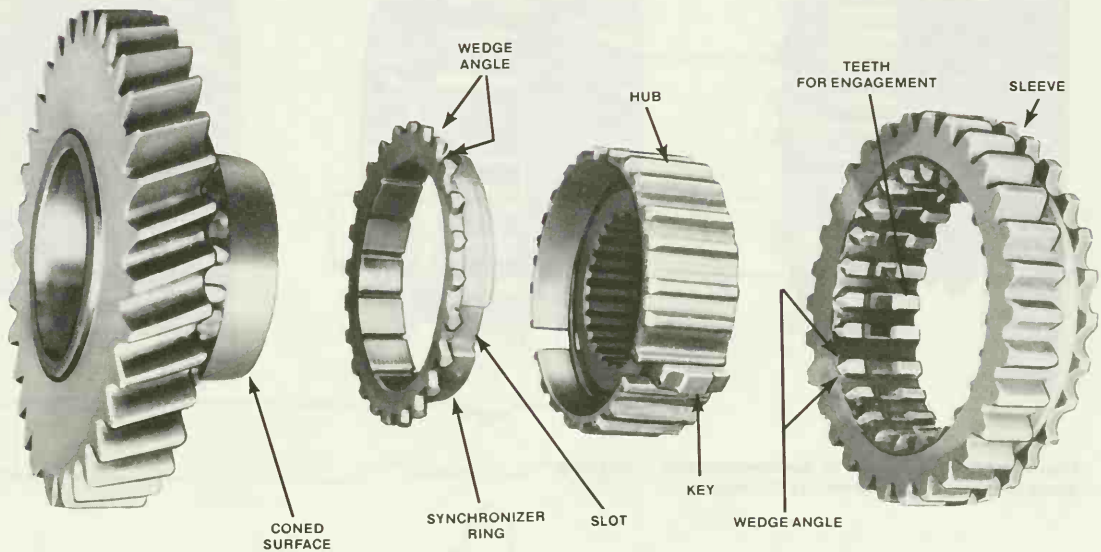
Exploded view of a synchronizer assembly. (Chevrolet Division of General Motors Corporation)
